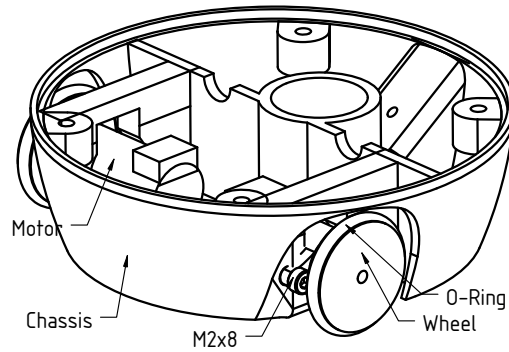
Assembly of wheel and motor for the left hand side of the robot. This assembly is mirrored on the other side. The motor is mounted to the bottom part of the chassis.
